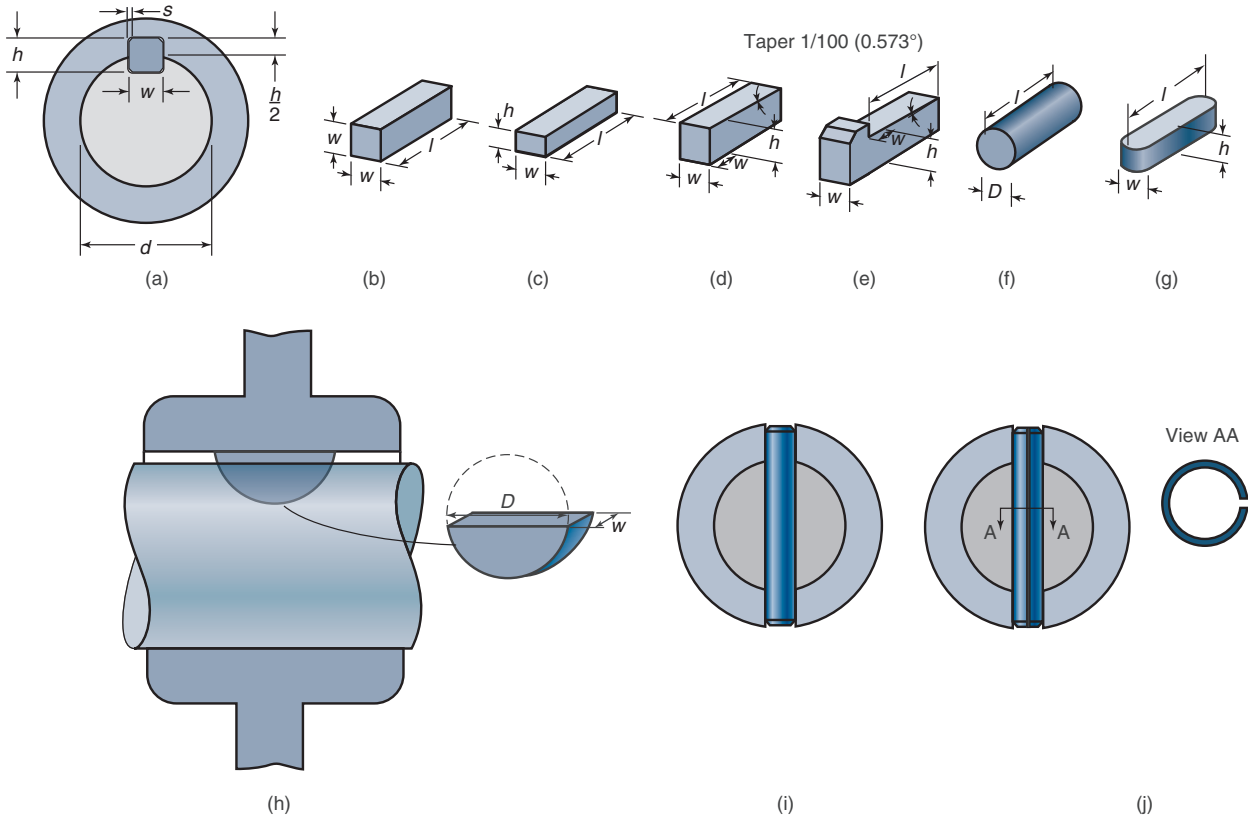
Illustration of keys and pins. (a) Dimensions of shaft with keyway in shaft and hub; (b) square parallel key; (c) flat parallel key; (d) tapered key; (e) tapered key with Gib head, or Gib-head key. The Gib head assists in key removal; (f) round key; (g) profile key; (h) Woodruff key with illustration of mounting; (i) pin, which is often grooved. The pin is slightly larger than the hole so that friction holds the pin in place; (j) roll pin. Elastic deformation of the pin in the smaller hole leads to friction forces that keep the pin in place.
